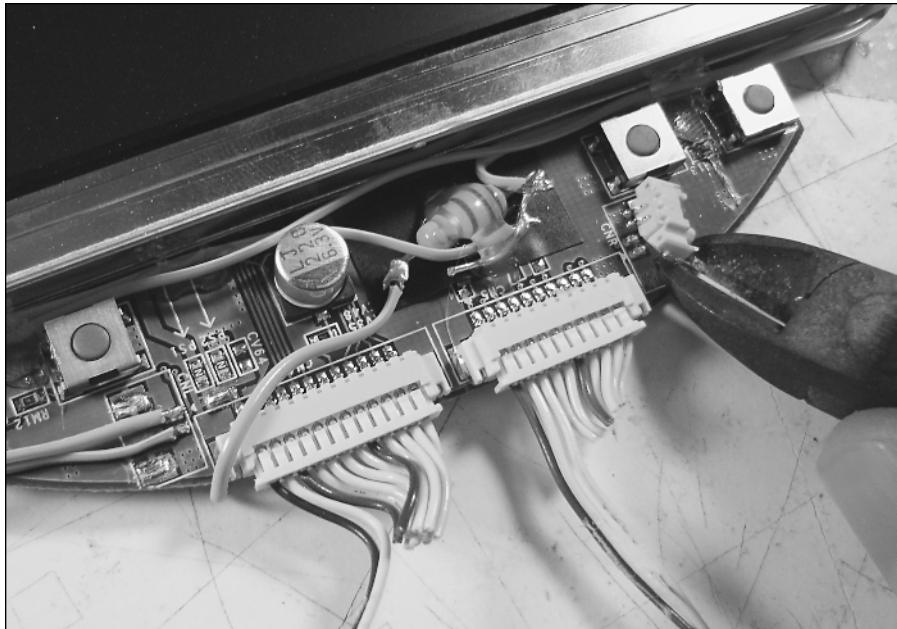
The cables cut, the speaker wire attached, and the old speaker plugs being removed.
